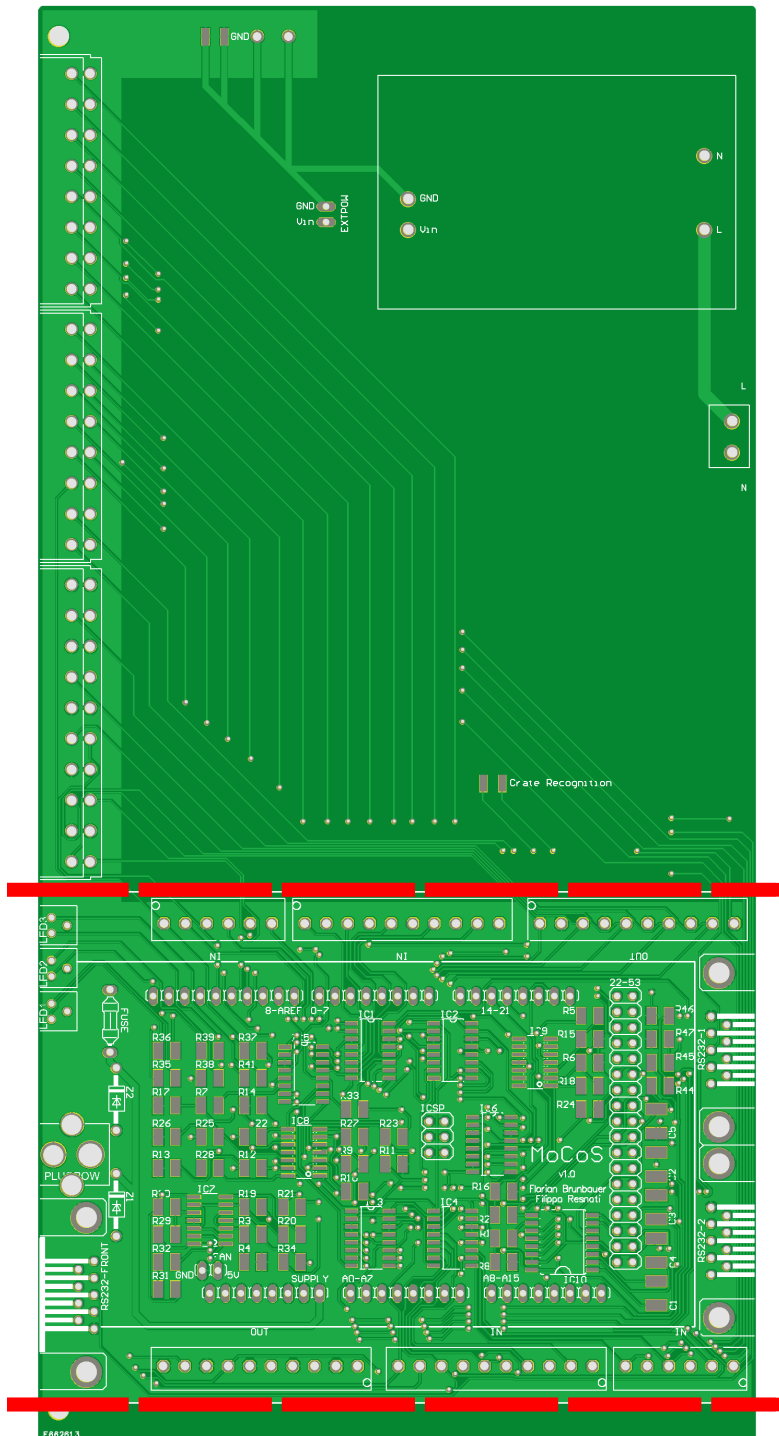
Cut PCB for portable version: When assembling a portable MoCoS device, please cut the signal conditioning PCB at the red lines.
